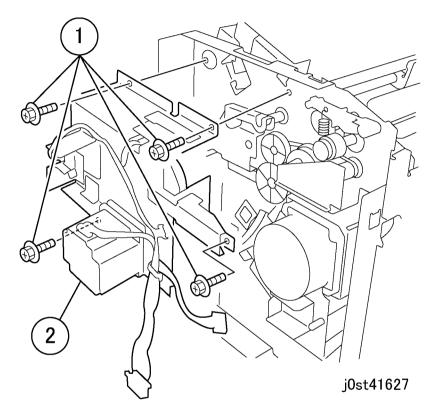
Removing the Cam Bracket Assembly (j0st41627)
